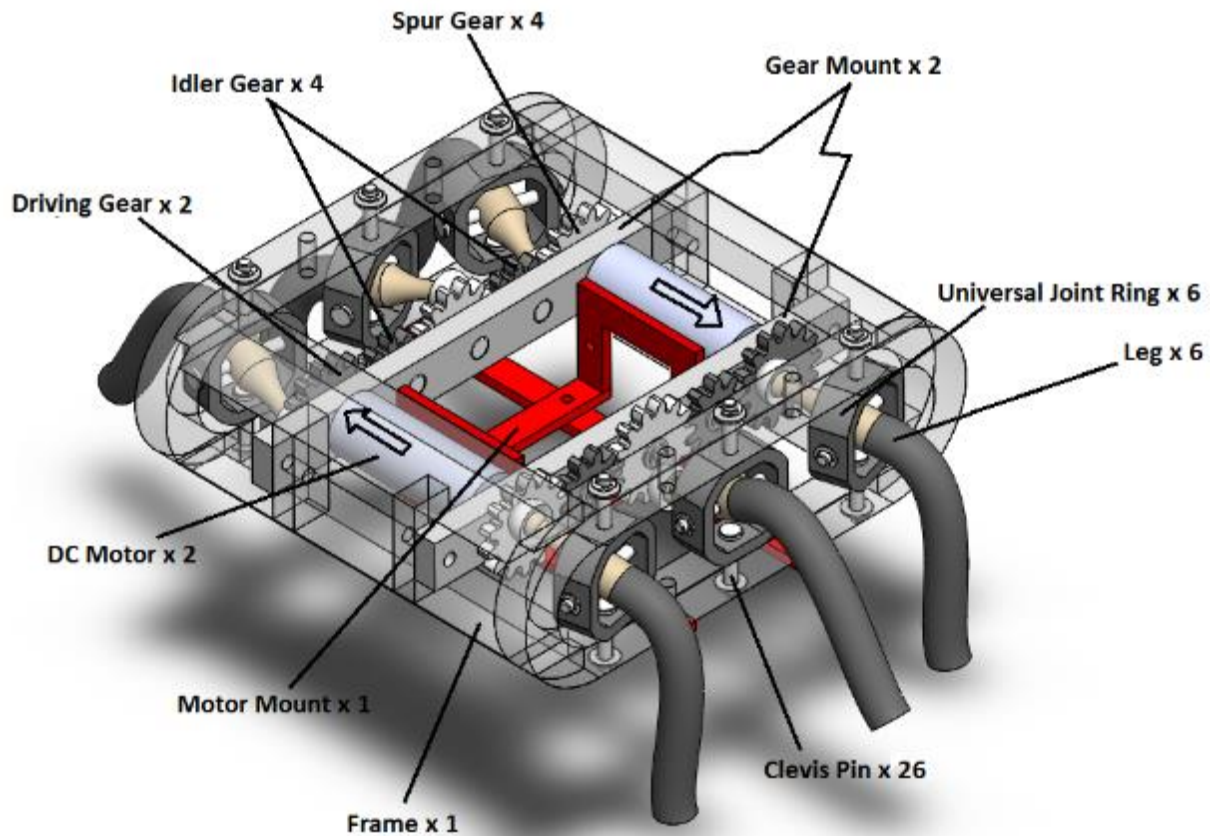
Entire labeled model. Arrows on the motors show where the shaft enters the gear mount and spur gear.
